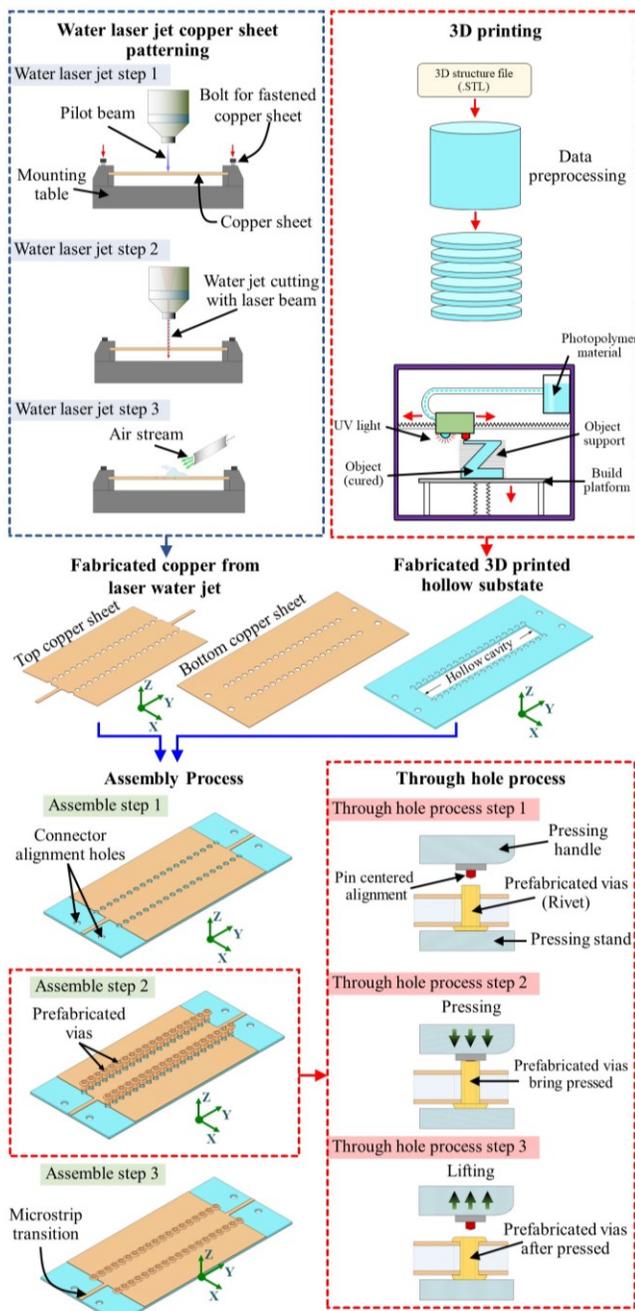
Process flow for 3D printed substrate, top and bottom copper sheet patterning and HSIW integration process.
